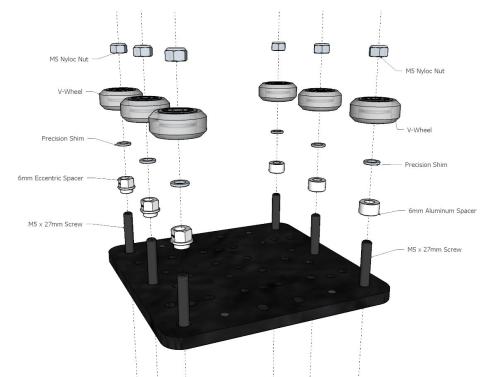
Assemble Z Axis Gantry Plate: Install V-Wheels: Exploded View
